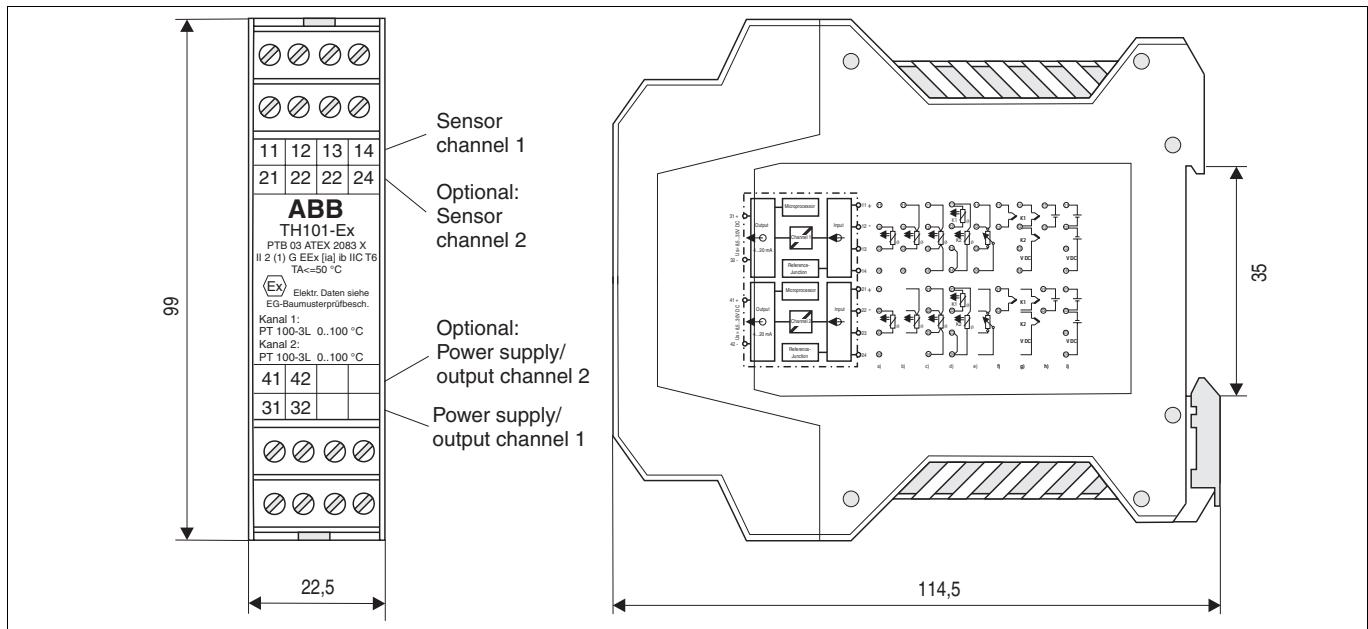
Dimensional drawings of TH101, TH101-Ex
